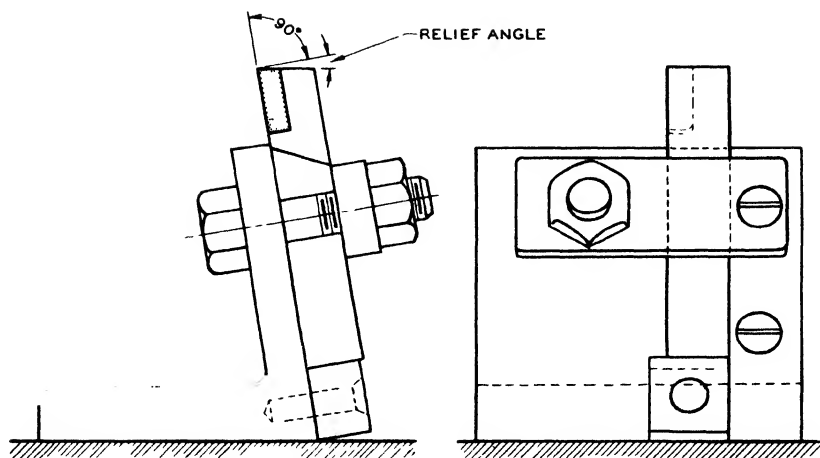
Angle Plate Fixture for Grinding Front Face and Relief
